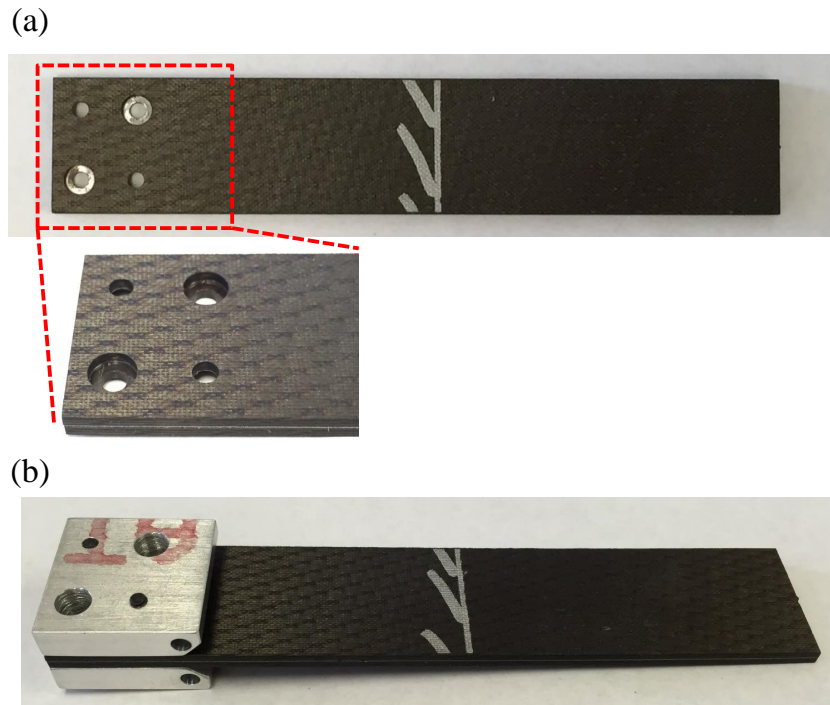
(a) Top view of a drilled double cantilever beam specimen for bonding hinges mechanically. (b) A double cantilever beam specimen with aluminum hinges mechanically attached.
